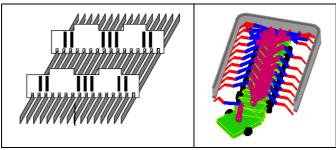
Assembling method for flat hull block and Three-link welding manipulator mounted on mobile platform
